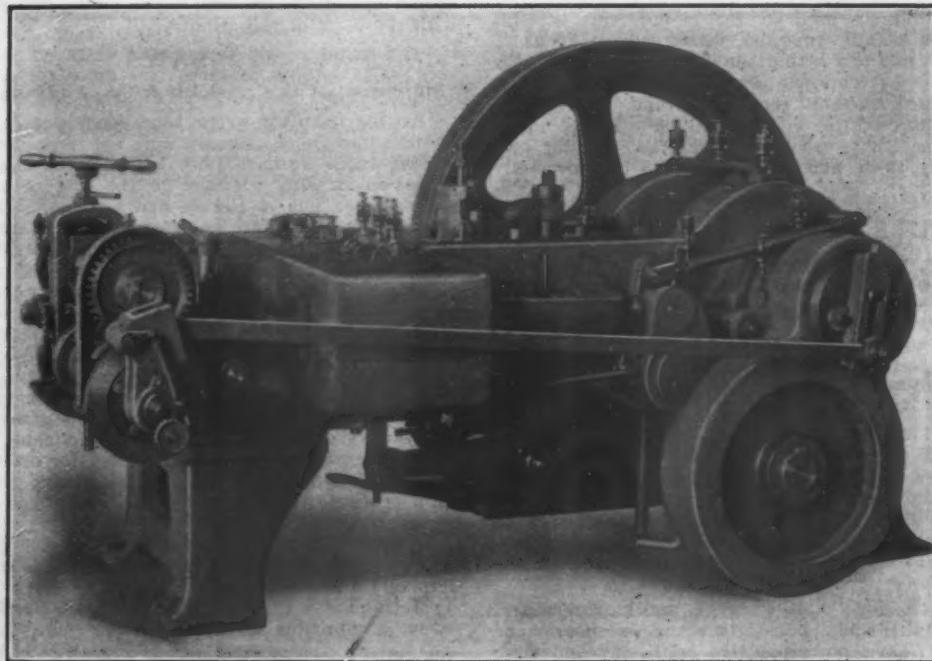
The New No. 4 Double Stroke Open Die Header Built by the E. J. Manville Machine Company, Waterbury, Conn.
